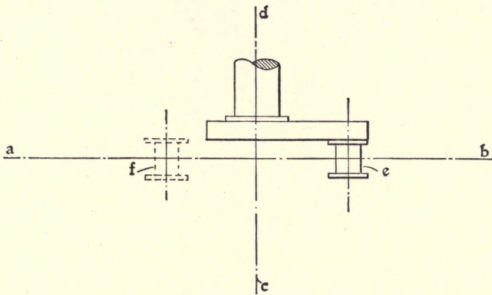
CHECKING ALIGNMENT OF ENGINE SHAFT.
